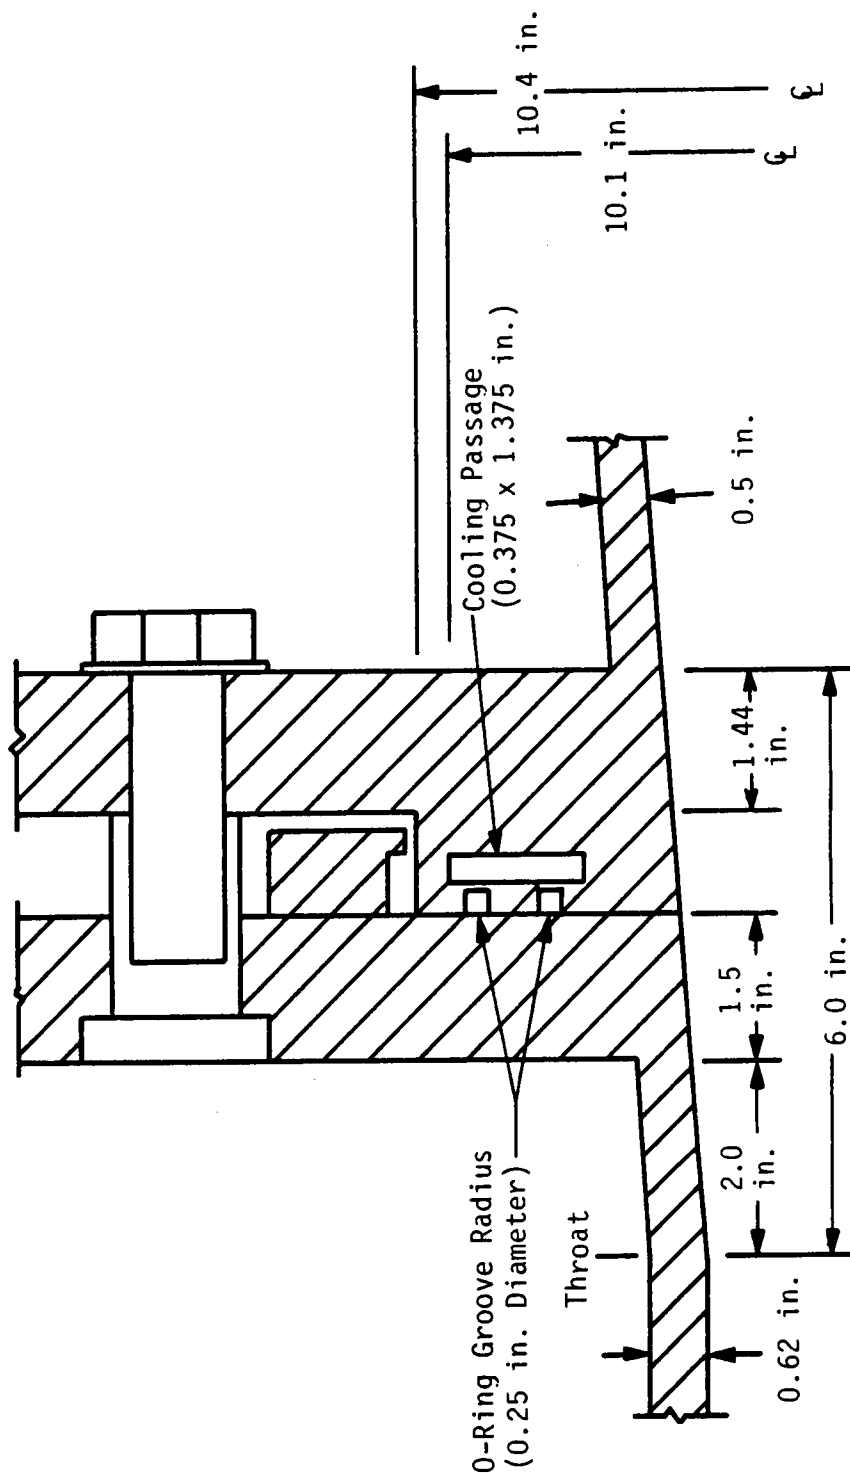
An Enlarged Cross-Sectional View of the Venturi Flanges
